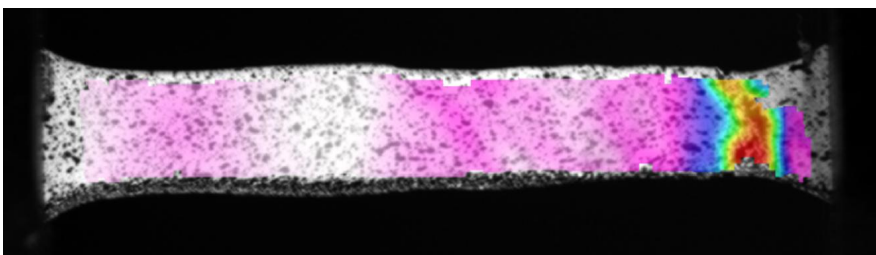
LaVision enables measurement of the strains in the different regions (HAZ, weld metal and base material) of tensile specimens extracted in the transverse direction.
